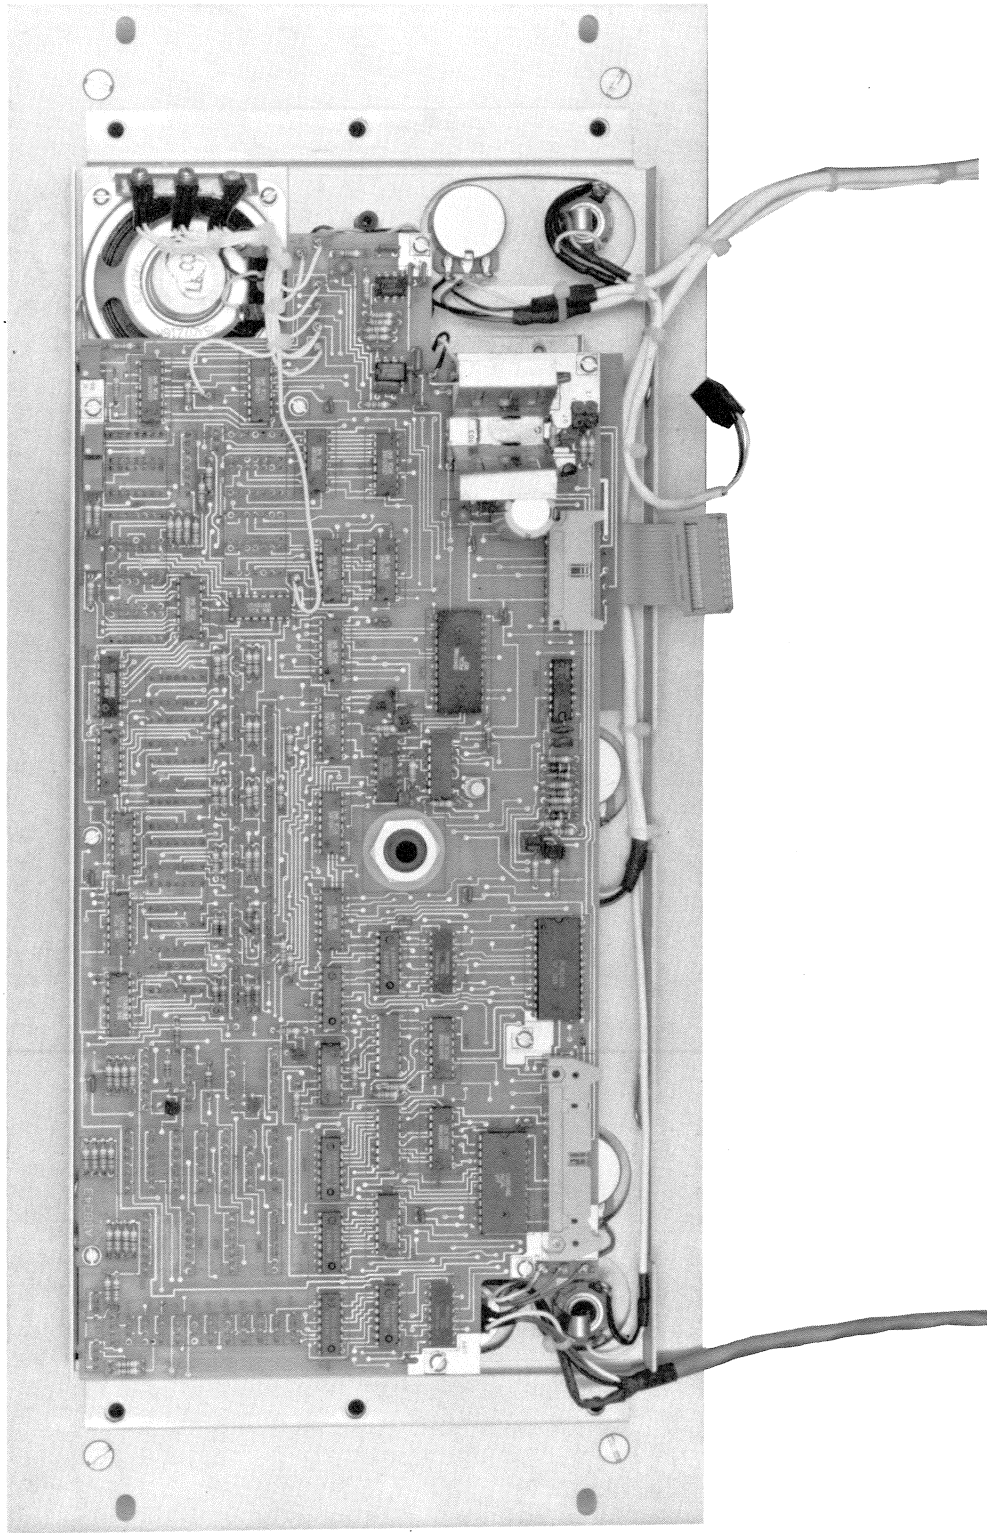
A. Front Panel Display A7A1, Overall Assembly
